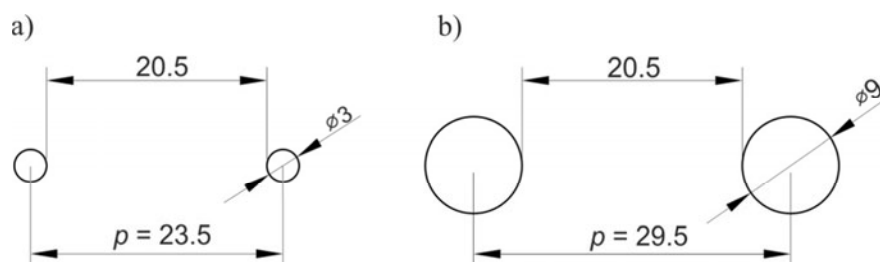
Spacings between connectors in (a) riveted ($p = 23.5$ mm) and (b) welded ($p = 29.5$ mm) configurations (dimensions in mm)
